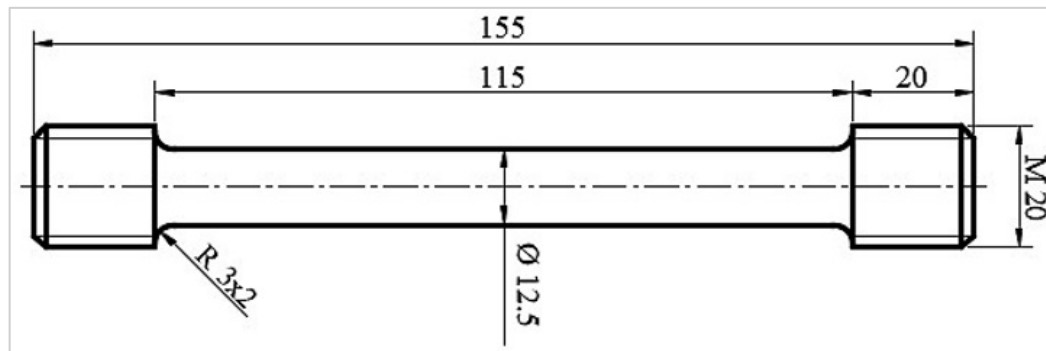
The dimensions of the tensile test specimen complies with ASTM E8 standard
